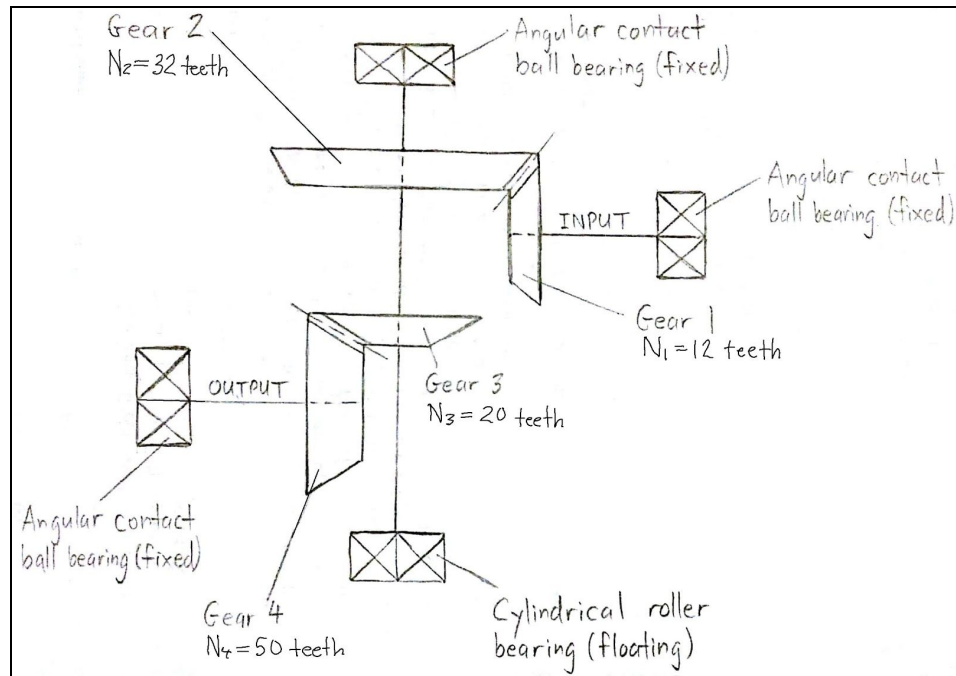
Solution 3 - Distinguished by Bevel Gears and Perpendicular Shafts
